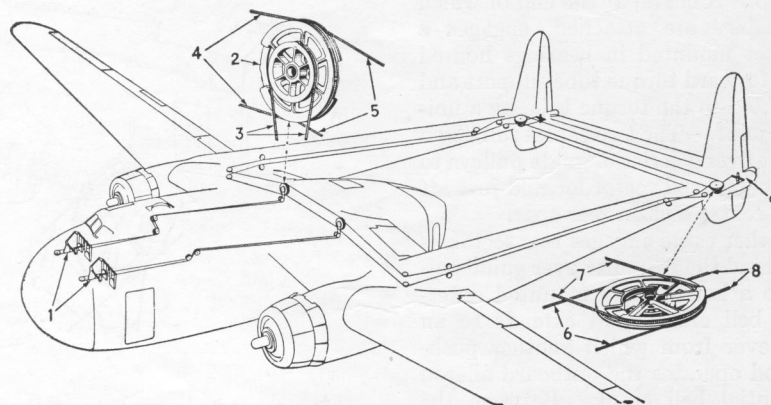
Rudder control system: (1) actuating sectors in the cockpit; (2) sector on rear spar; (3) cable to cockpit; (4) to surface; (5) interconnect; (6) to rear spar sector; (7) interconnect; (8) to horn; (9) location of stop.
